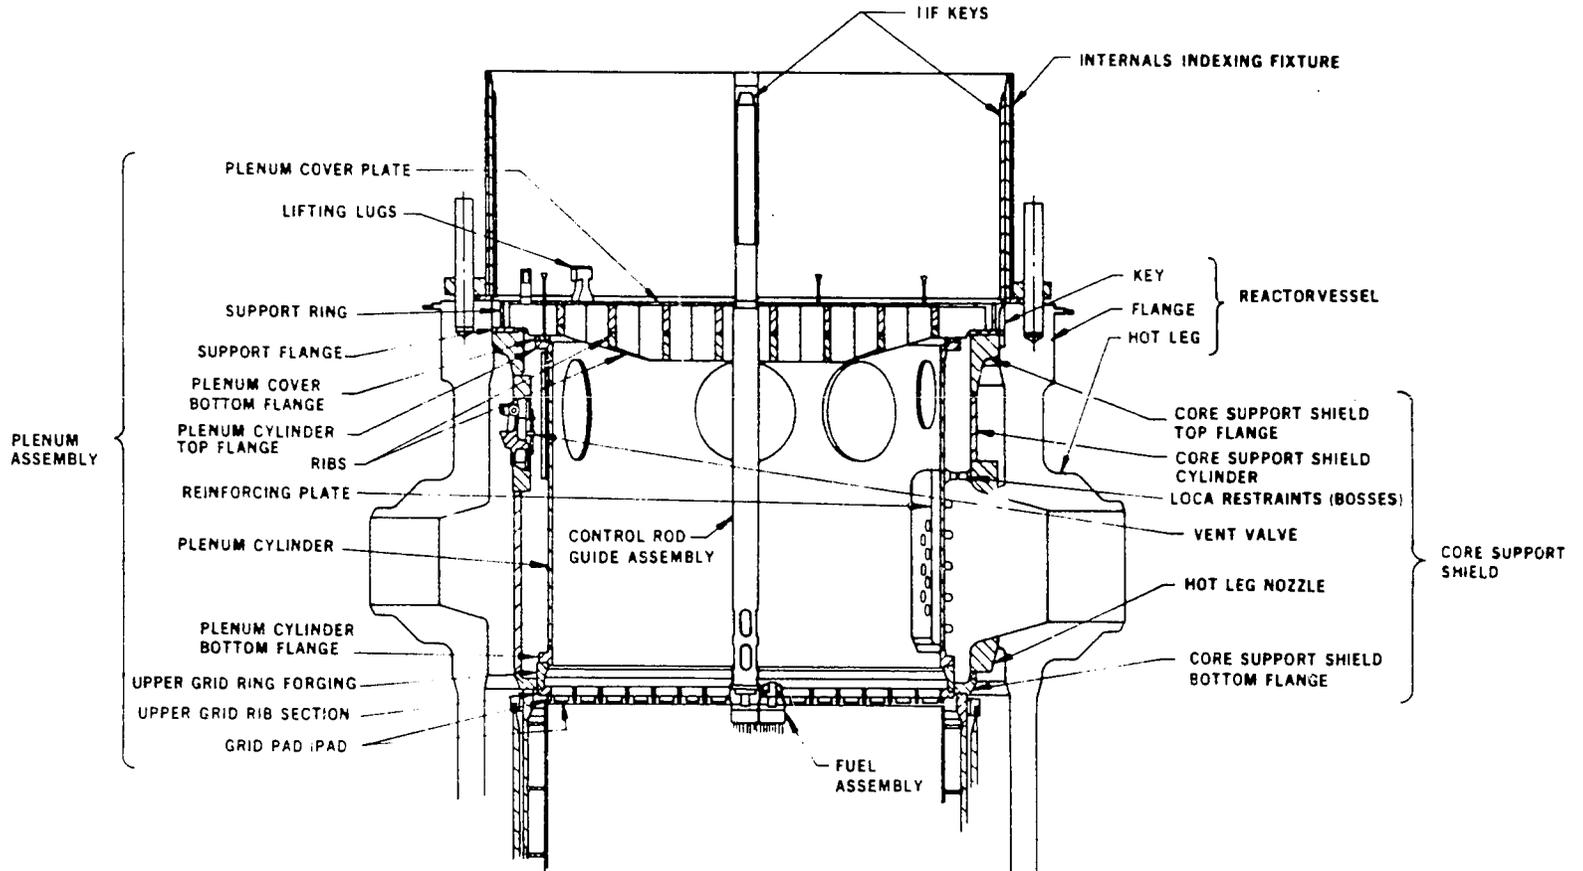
Cross-sectional view of plenum assembly and adjacent reactor components, including nomenclature
